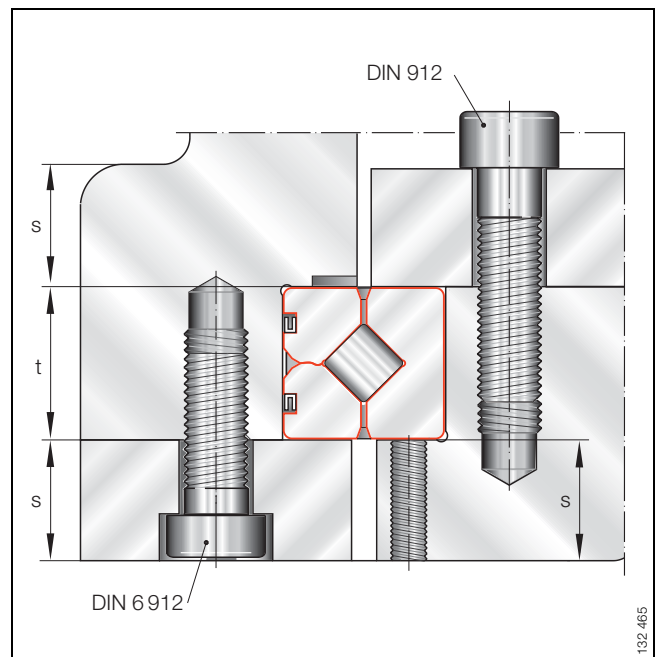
· Bearing seat depth  $t$ , clamping ring thickness  $s$
